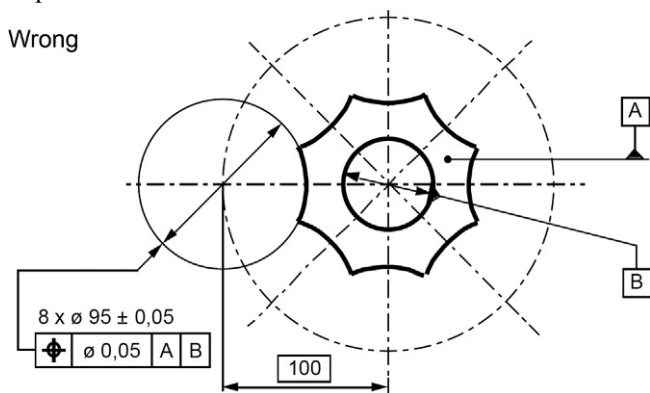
Not inspection appropriate tolerancing
